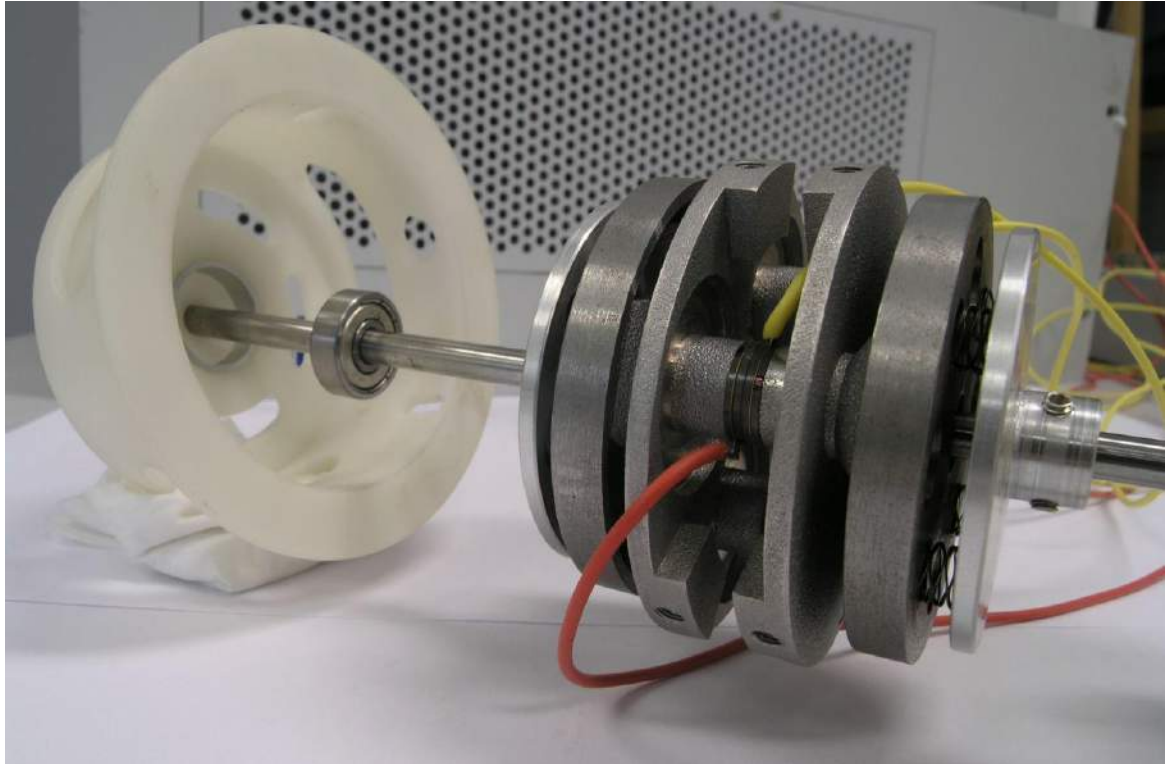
The assembled parts of the prototype multicell piezoelectric motor
